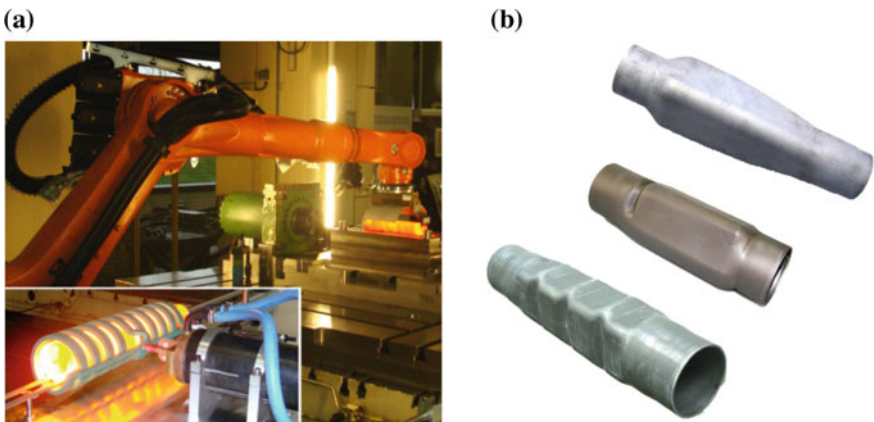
Hot hydroforming studies at Fraunhofer IWU: a induction heating and the robotic material handling system, b sample parts produced, including a crashbox (recreated after [41])
